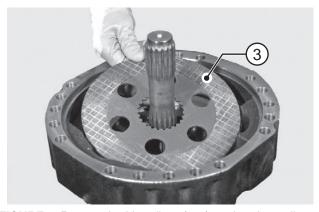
Remove braking discs (2, 3), noting down direction of assembly.
